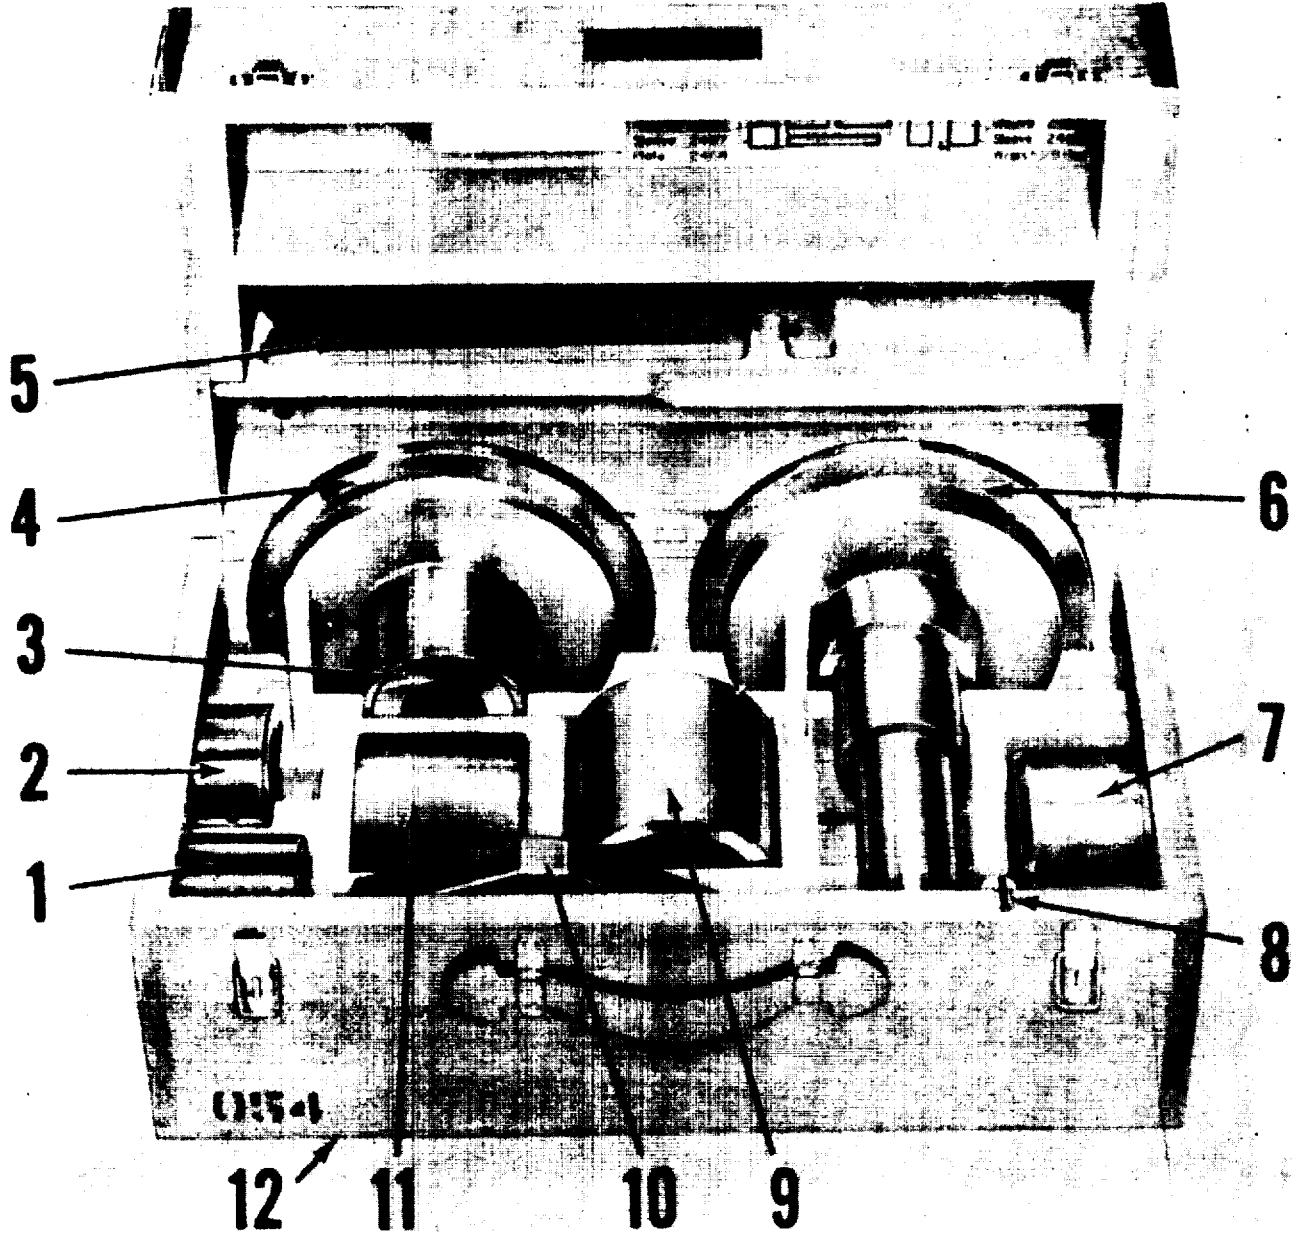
Small Parts Balancing Kit 7HEL053.
